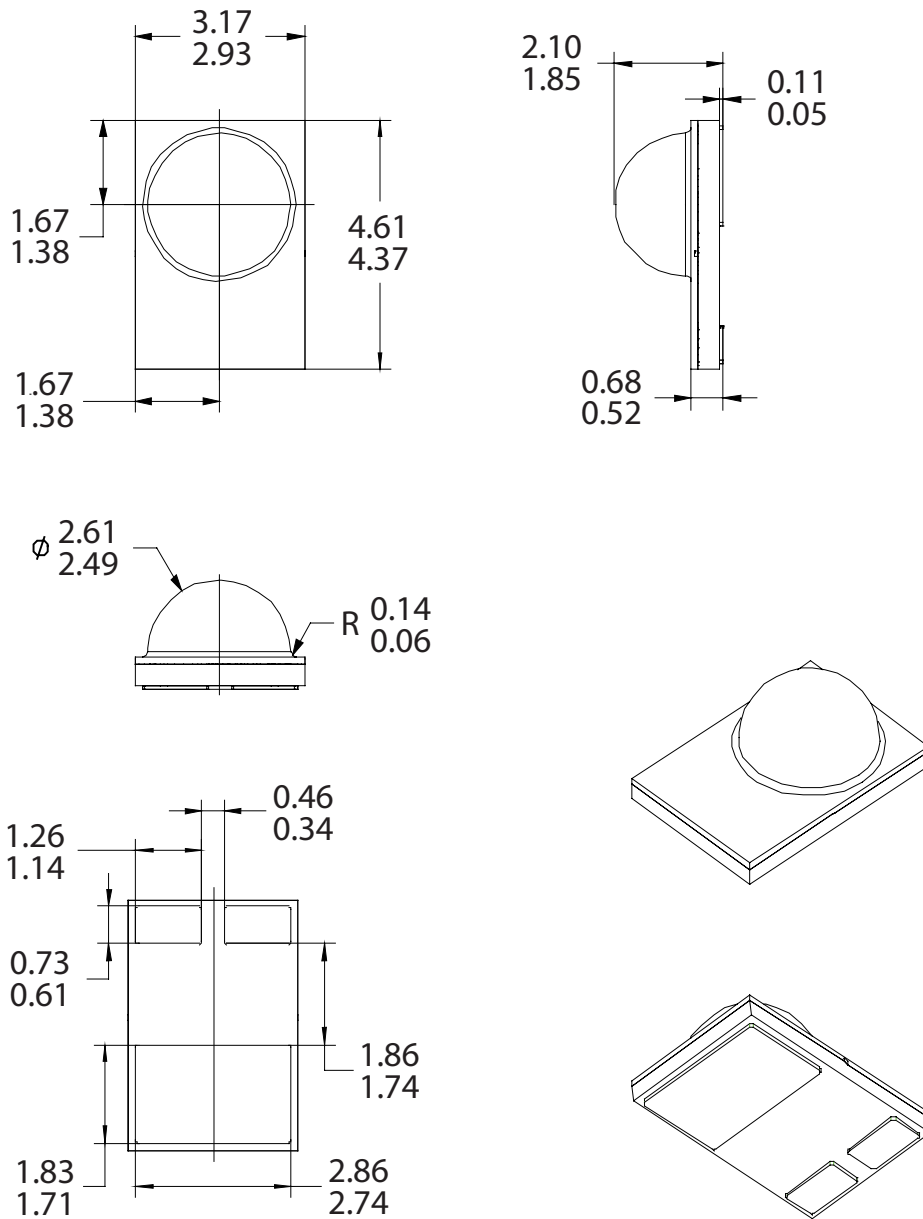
Mechanical dimensions for LUXEON Rebel Color Line.
